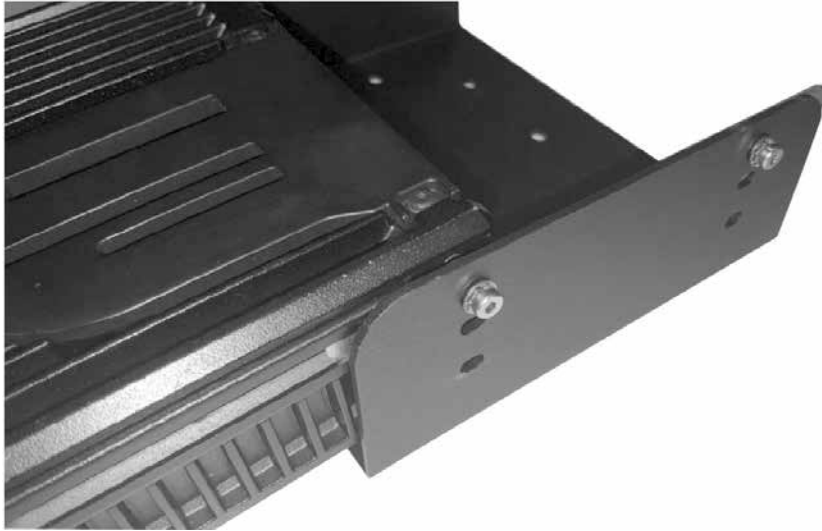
Align Bracket Rail Plates with VCH Rails
